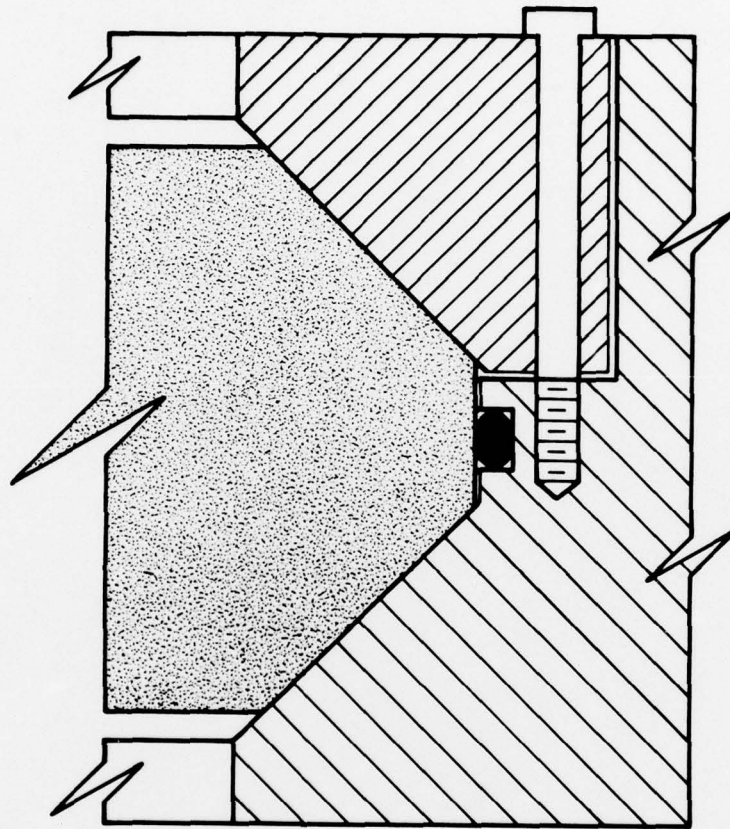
Sealing arrangement for twin-beveled discs using a radially compressed O-ring located in a groove machined into the cylindrical surface of the mounting. This design is acceptable because the O-ring groove does not decrease the fatigue life of the window. Inaccessibility to the bottom of the groove makes it difficult to clean out the rust during scheduled maintenance overhauls of the viewport assembly.
